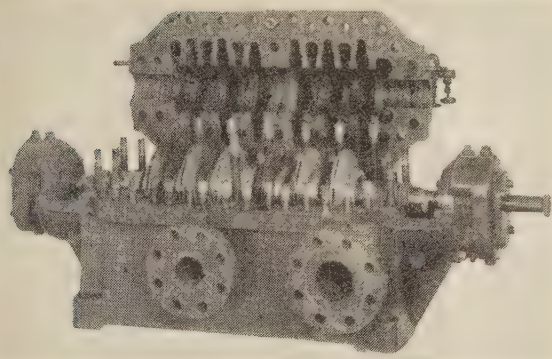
SPLIT-CASE FEATURES COMMON TO ALL PIPE-LINE PUMP-ING EQUIPMENT BUILT BY UNITED STATES MANUFACTURERS
